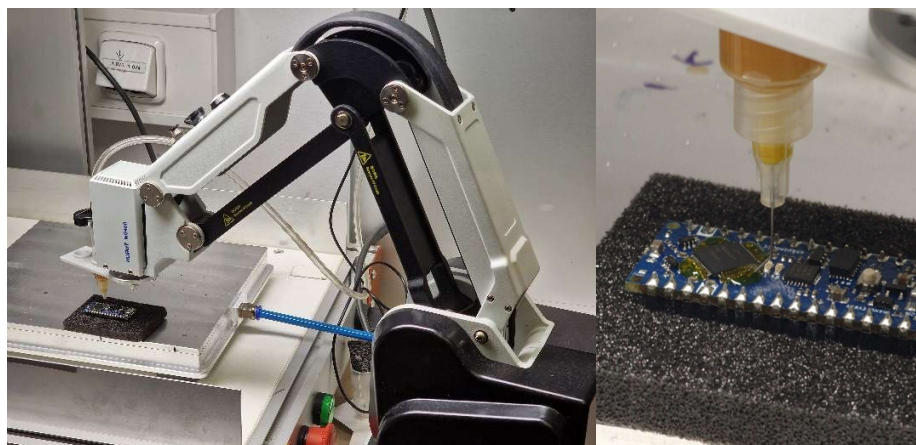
Collaborative robot with microdispensing printing head, printing of desoldering paste on pads of MCU at Arduino Nano PCB.
